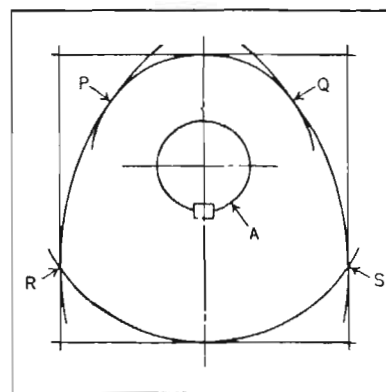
Lay-out of Cam Used on Mechanism Shown in Fig. 4
